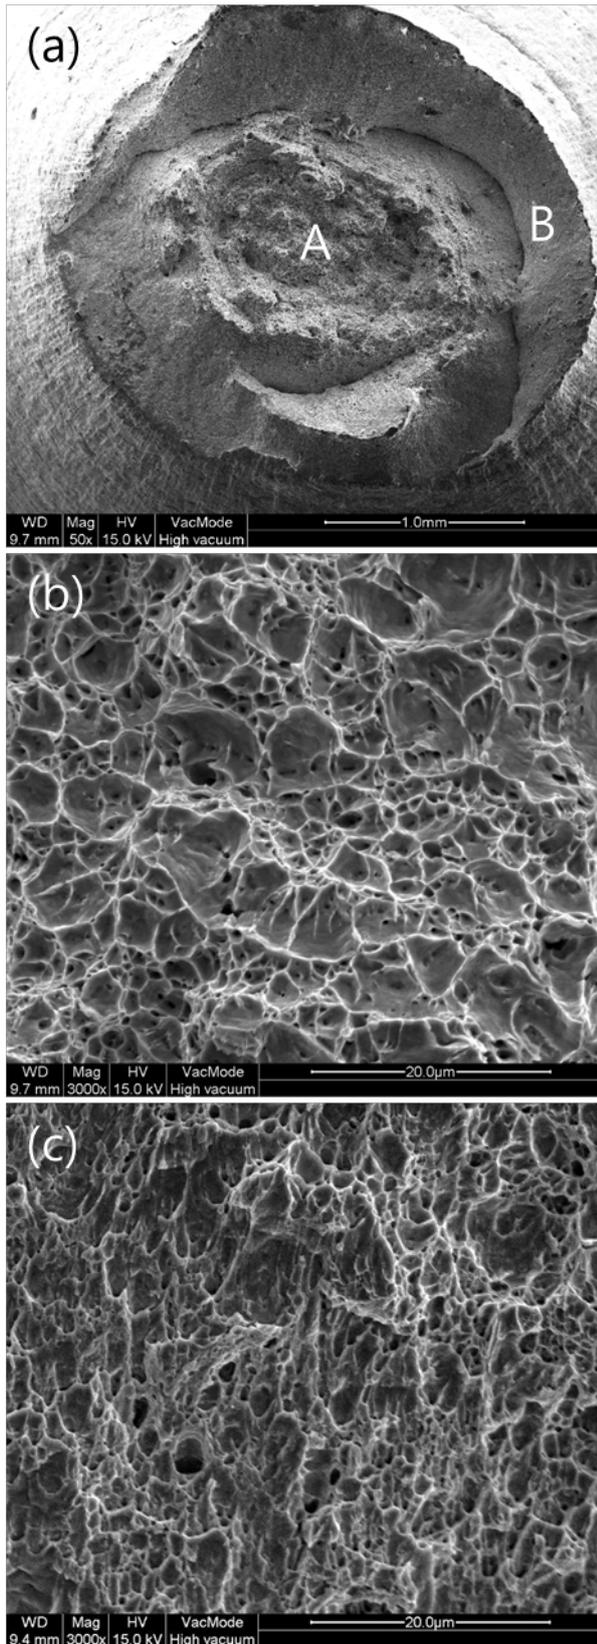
Fracture surfaces of a specimen of API X70 tested in the air.
